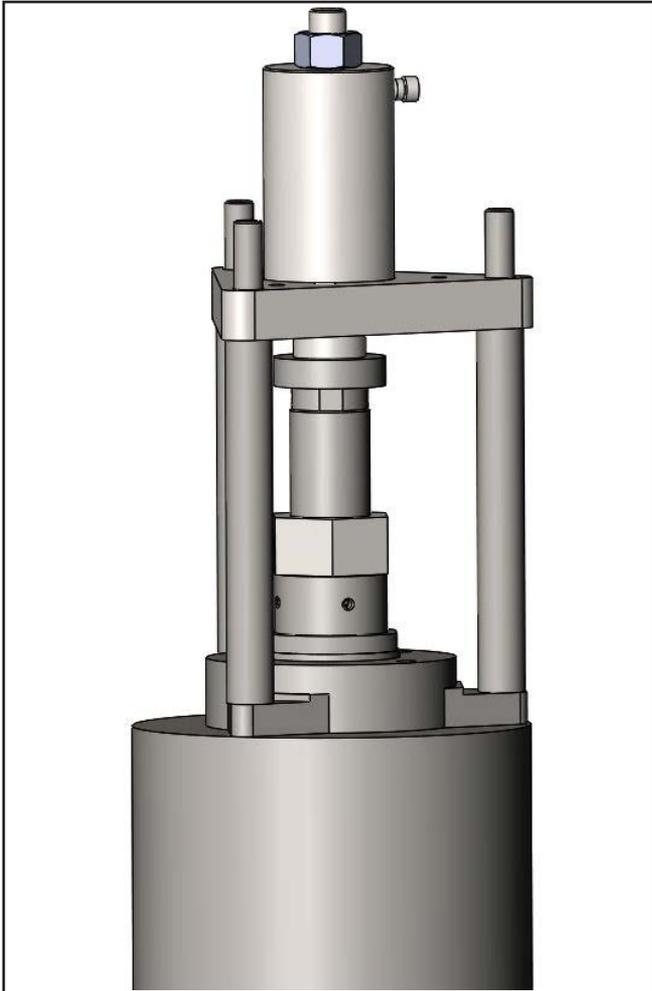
A: Hydraulic Set Device Layout used as an Auxiliary Lift Device
